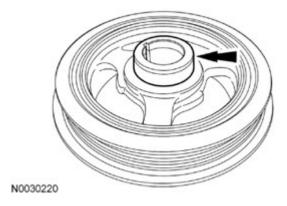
Locating Crankshaft Pulley Sealing Area Courtesy of FORD MOTOR CO.
